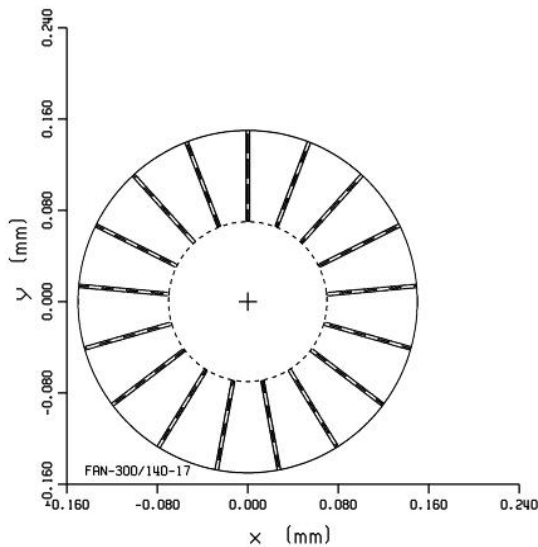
Drawing of the radial flow fan-impeller with straight cylindrical blades viewing from rotational axes
